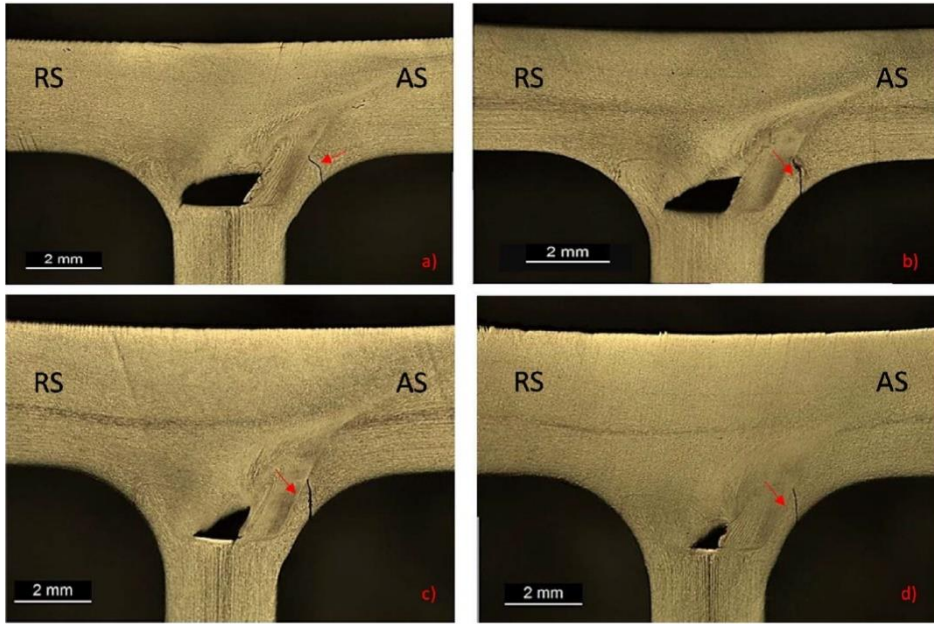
Morphology of the 6082-T6 T-lap welds: a) LP6-1; b) LP6-2; c) LP6-3; (c) d) LP6-4 (d). RS-retreating side, AS-advancing side.
